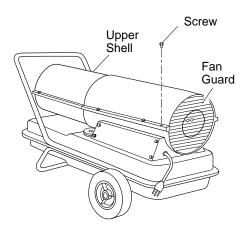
Upper Shell Removal 115,000 Btu/Hr Models
